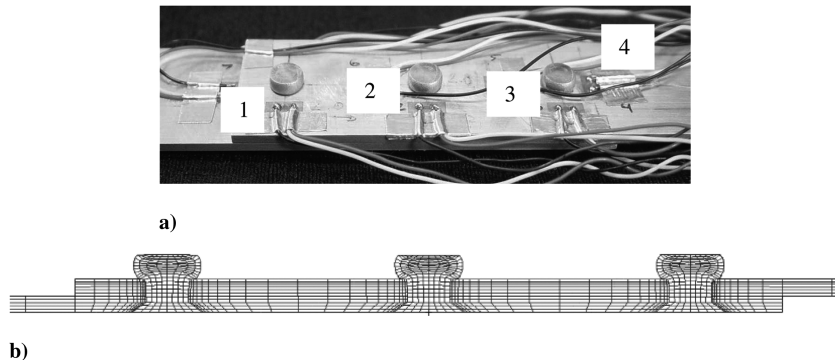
MS20426AD5-6 rivet driven-head deformations in the lap joint after the riveting process using the 18 kN rivet squeeze force obtained from a) experimental and b) FE results.
